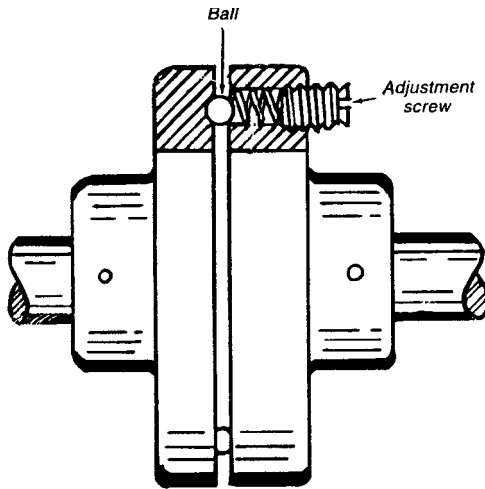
Mechanical keys. A spring holds a ball in a dimple in the opposite face of this torque limiter until an overload forces it out. Once a slip begins, clutch face wear can be rapid. Thus, this limiter is not recommended for machines where overload is common.
